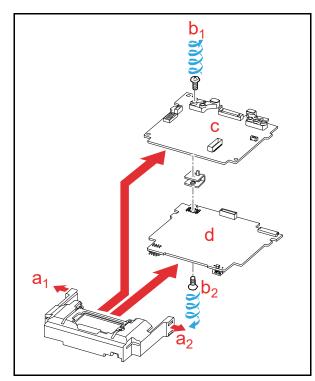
Validation CPU Board and Control CPU Board Removal
